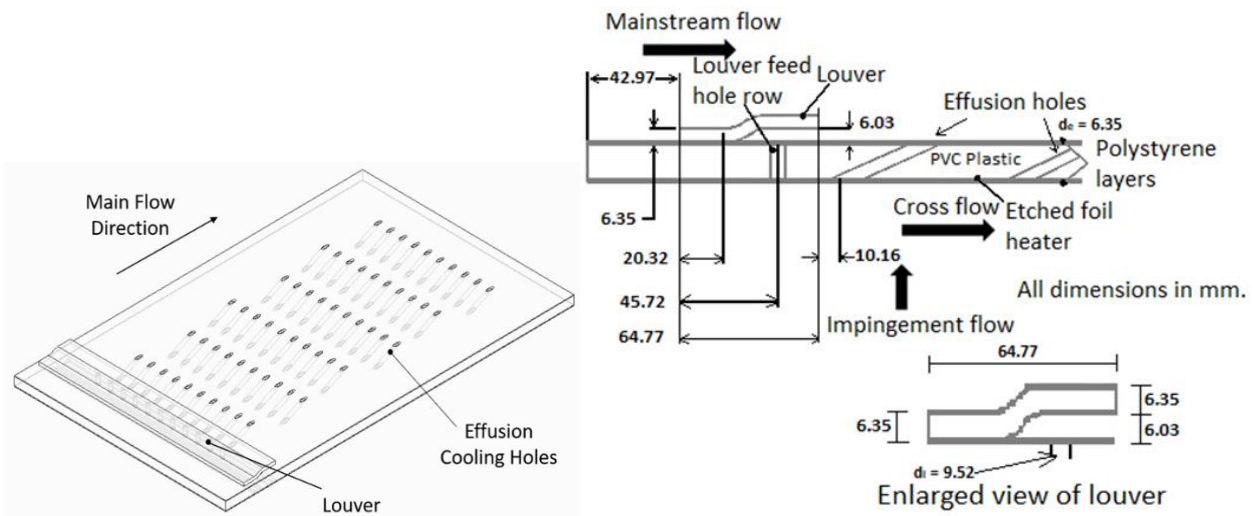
Test section configuration. Left, a three-dimensional view of test plate, including louver slot device and full-coverage film cooling holes. Right, side cross-sectional view of louver slot. All dimensions given in millimeters.
